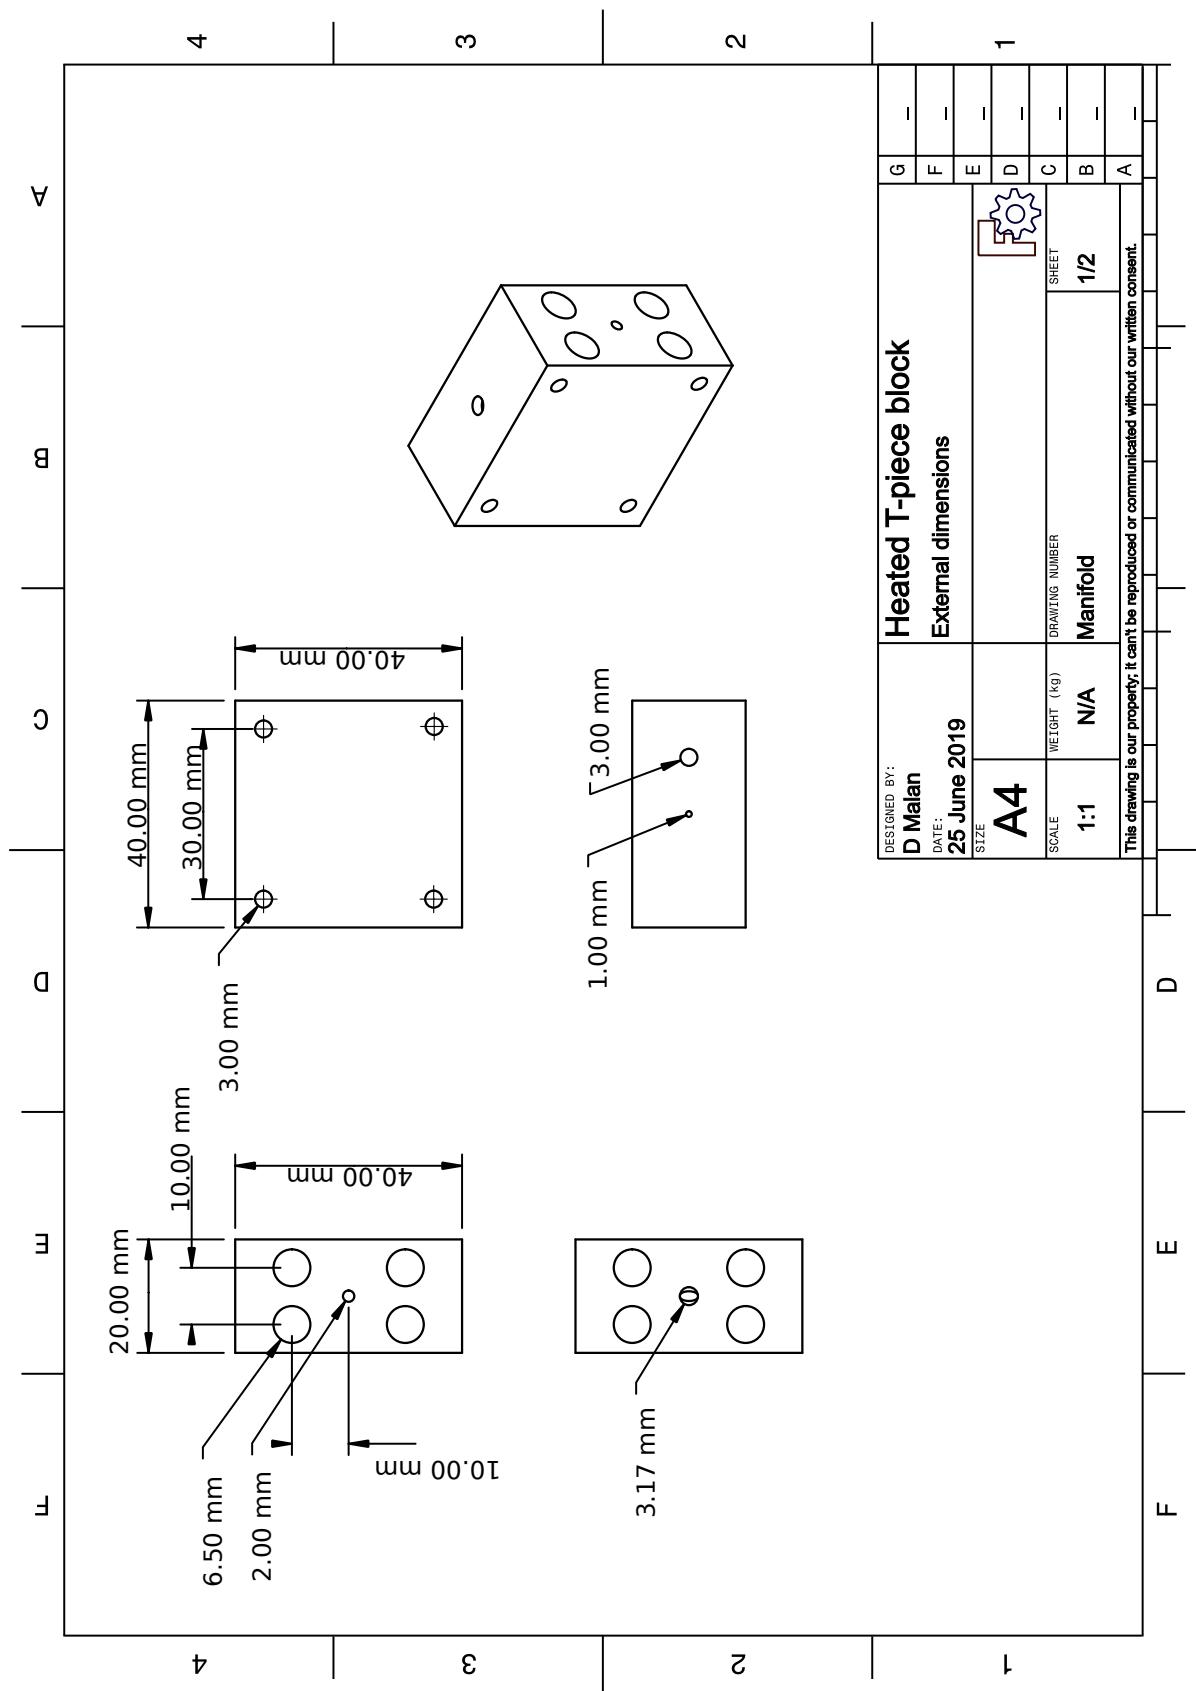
A technical drawing showing the dimensions of the heated T-piece blocks.
